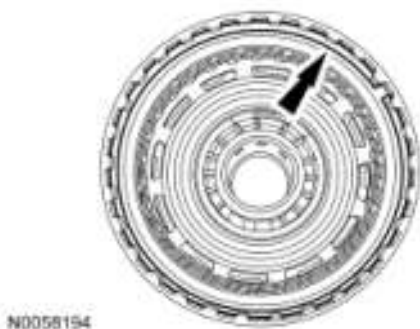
Locating Intermediate Clutch Plate Snap Ring
